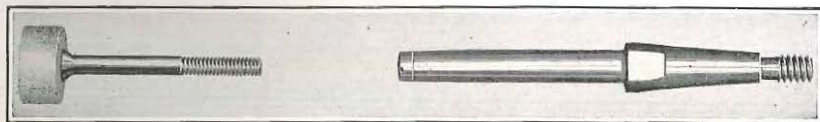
Arbor and wheel for internal grinding. The threaded portion serves only to pull arbor into tapered socket.
